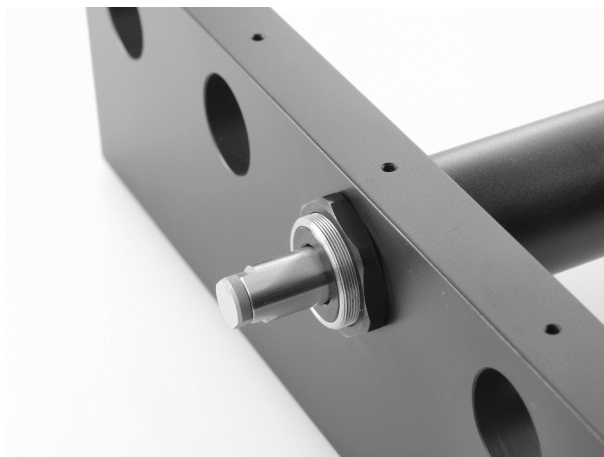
Example for the installation of a linear actuator (here: an M-235)
